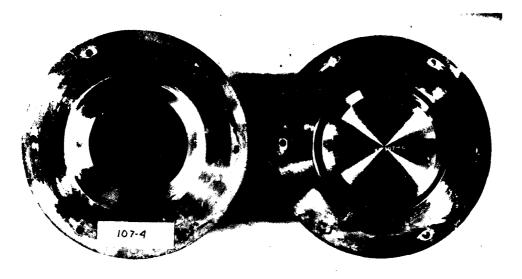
Aluminum angular flange test jig with anode after exposure showing corrosion of flange to seal.
